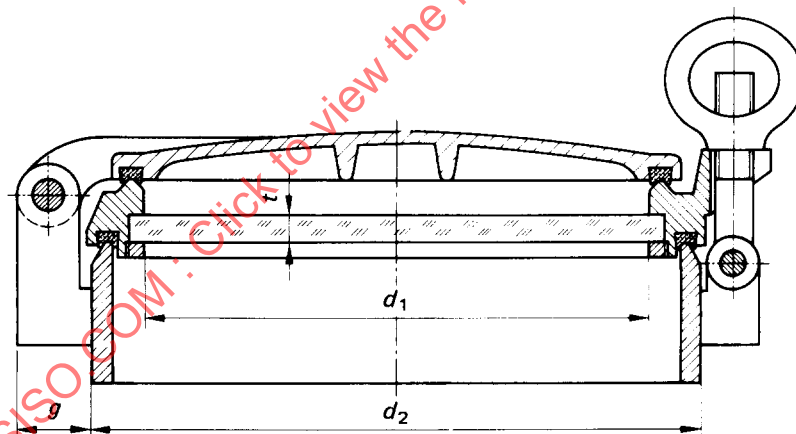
Opening side scuttle with deadlight, welded
